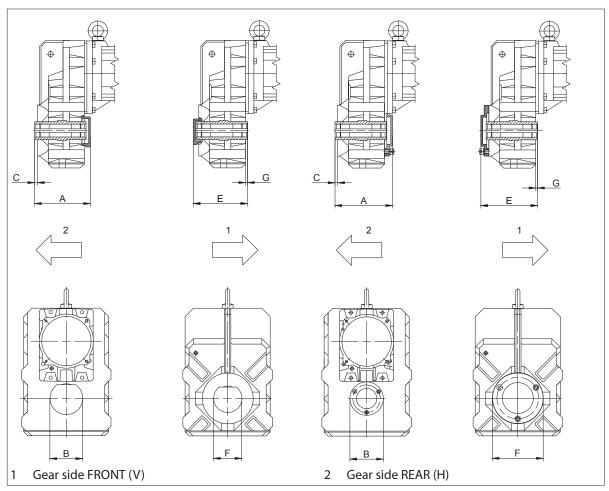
SSV cover for shaft-mounted gearbox BF10 ... BF90 – sealing caps (left) and sealing covers (right)
